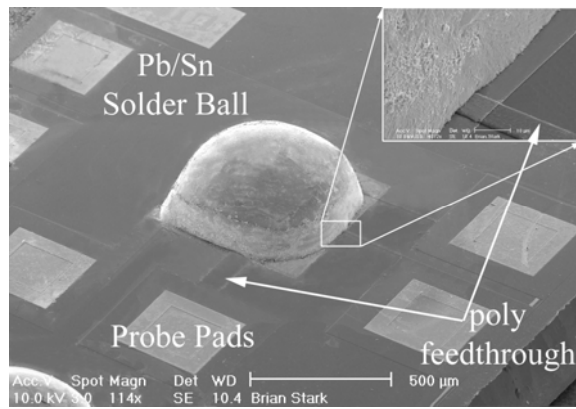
Pirani gauge encased in micro Pb/Sn solder ball
